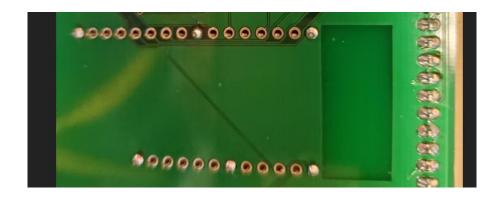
Soldering 3 pins of each connector to the PCB with the Argon still inserted.
